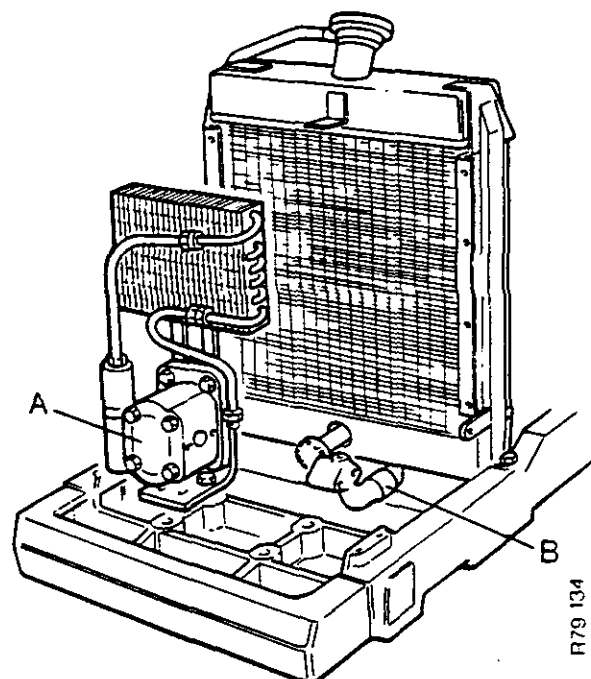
REMOVAL OF THE HYDRAULIC PUMP
